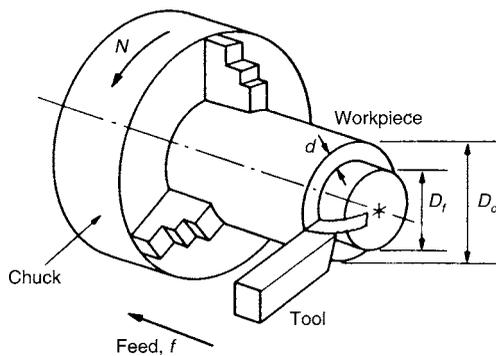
A turning operation on a round workpiece held in a three-jaw chuck.
